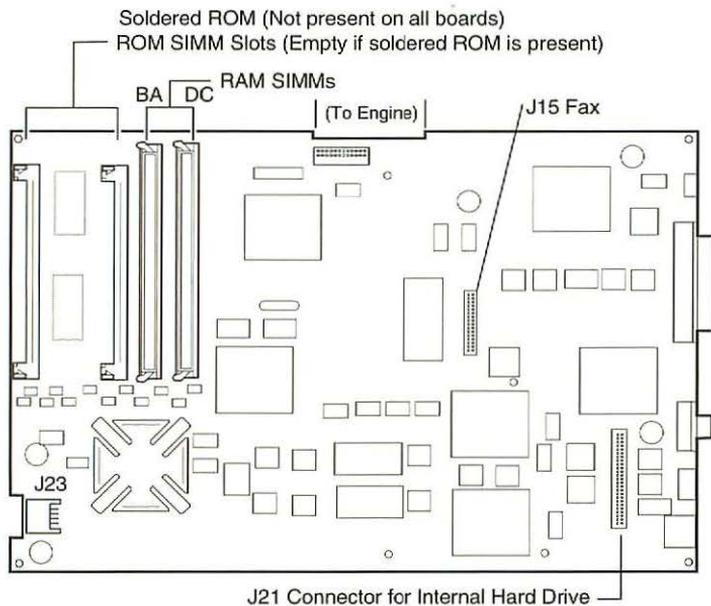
LaserWriter 16/600 PS I/O Controller Board
